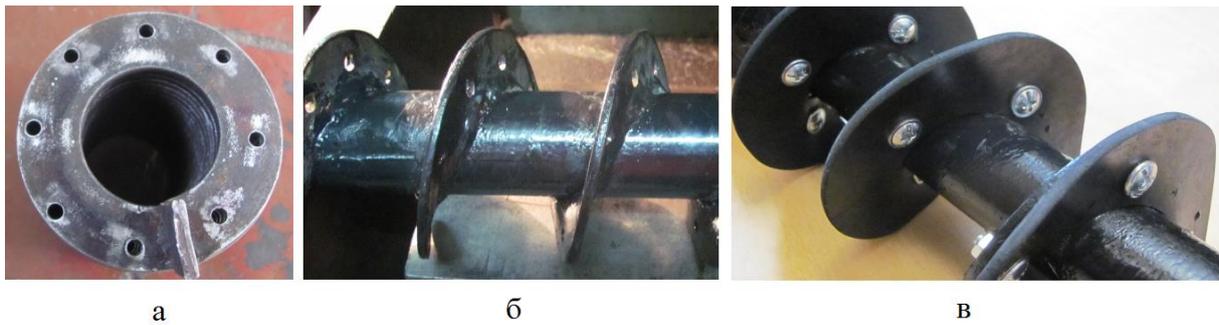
Manufacturing method for auger conveyor with elastic screw blade
